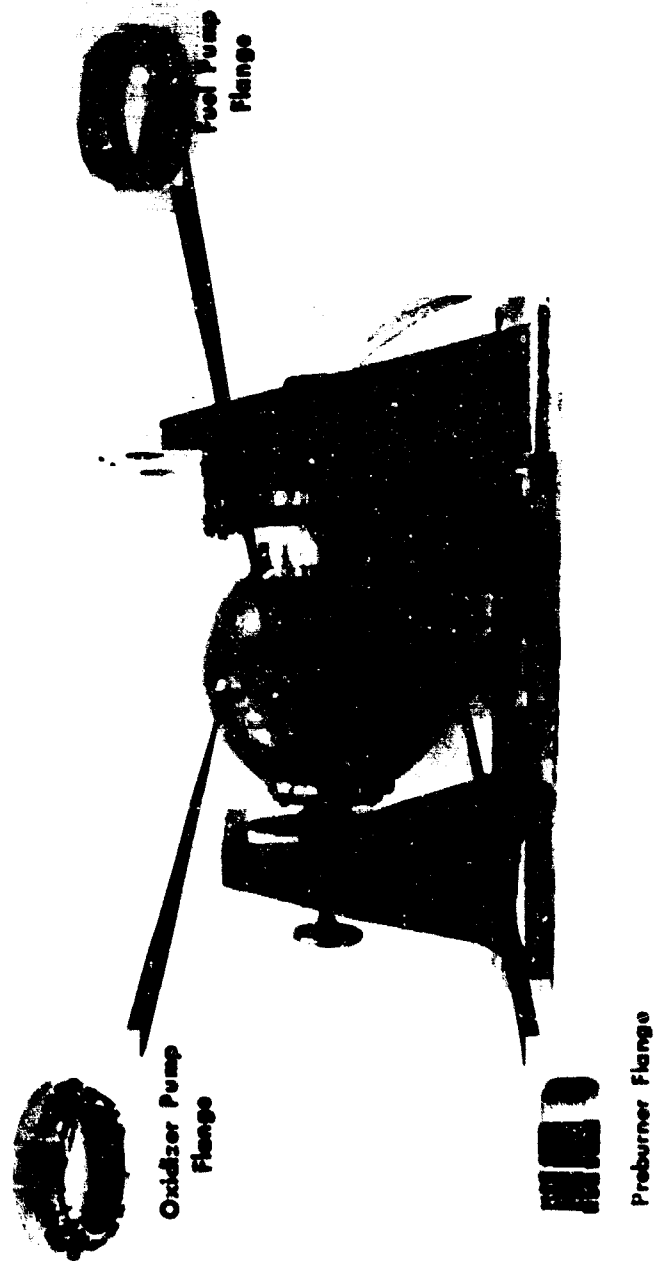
Sphere Showing Two Segments Welded in Position
